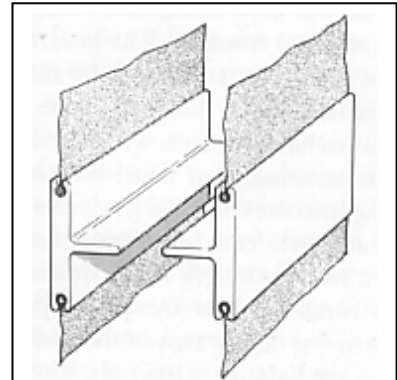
Section through & Gallant batten-showing sail panels fitting into batten.
